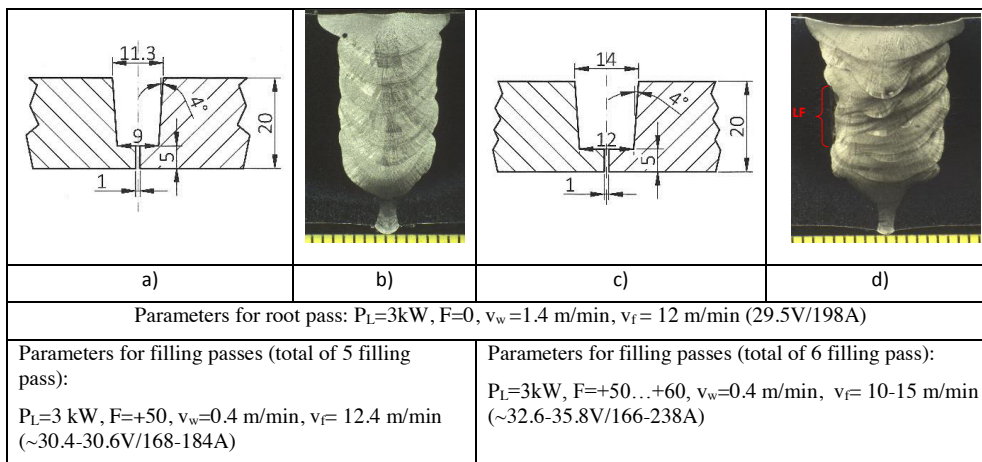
Groove geometries used in laser-arc hybrid multi-pass tests and corresponding weld macro cross-sections.
